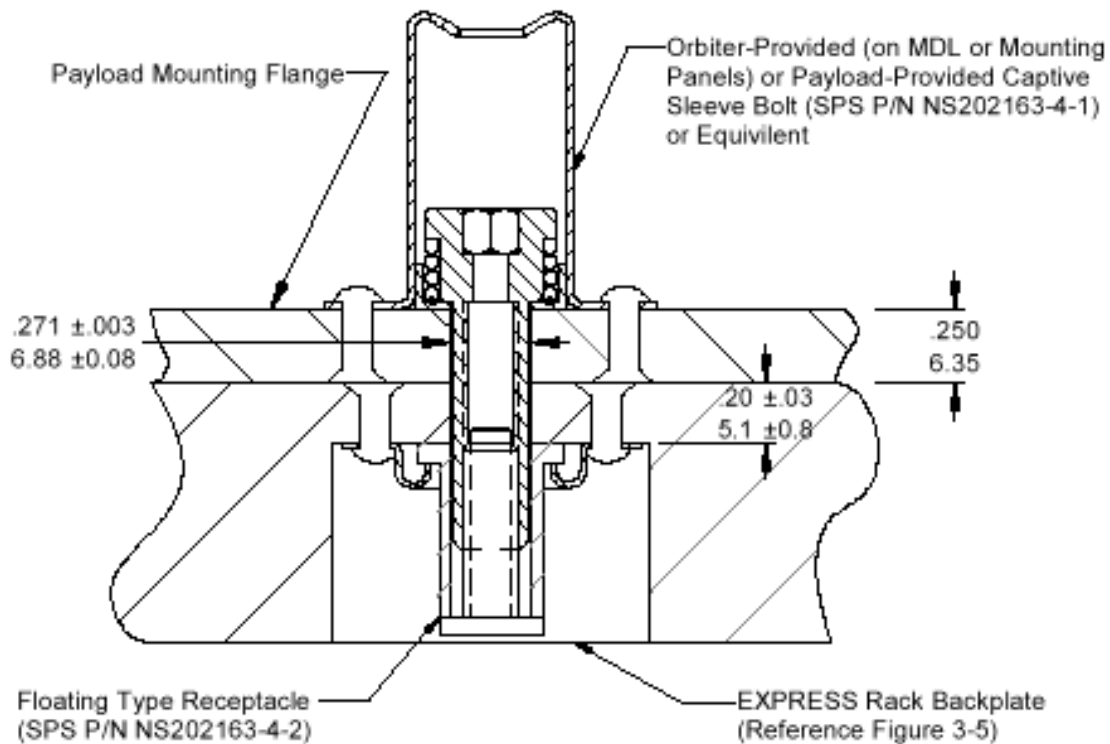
PAYLOAD/EXPRESS RACK BACKPLATE ATTACHMENT POINT DETAILS (Sheet 2 of 2)
